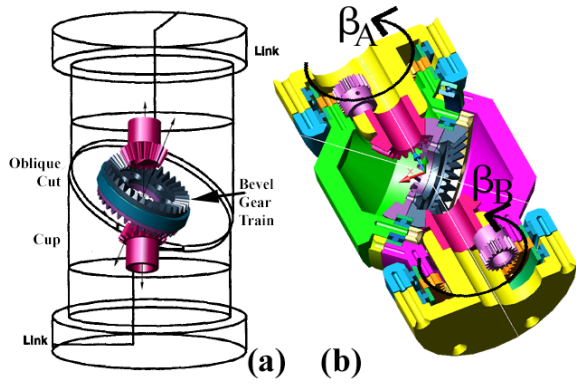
(a) Bevel gear train replacing the universal joint. (b) Our patent pending joint design.
